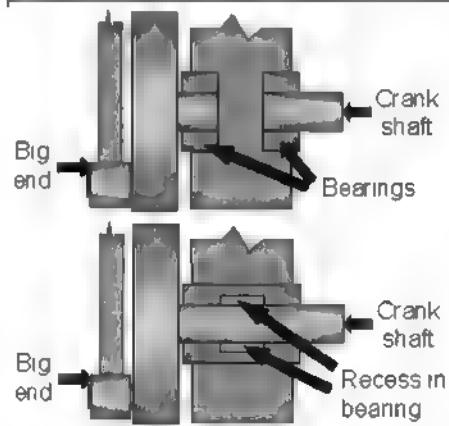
Two better designs of main bearing for a single-cylinder engine.
